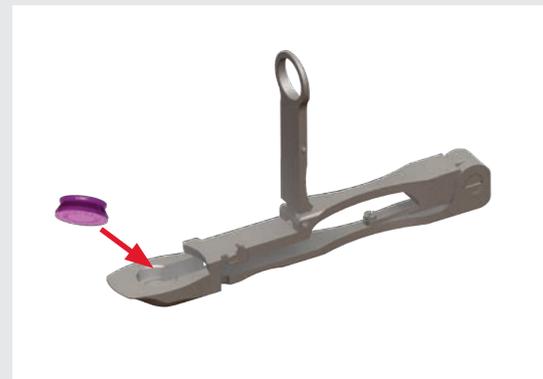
Placing the Non-Magnetic Spacer or the Replacement Magnet in the tip of the Magnet Insertion Tool
